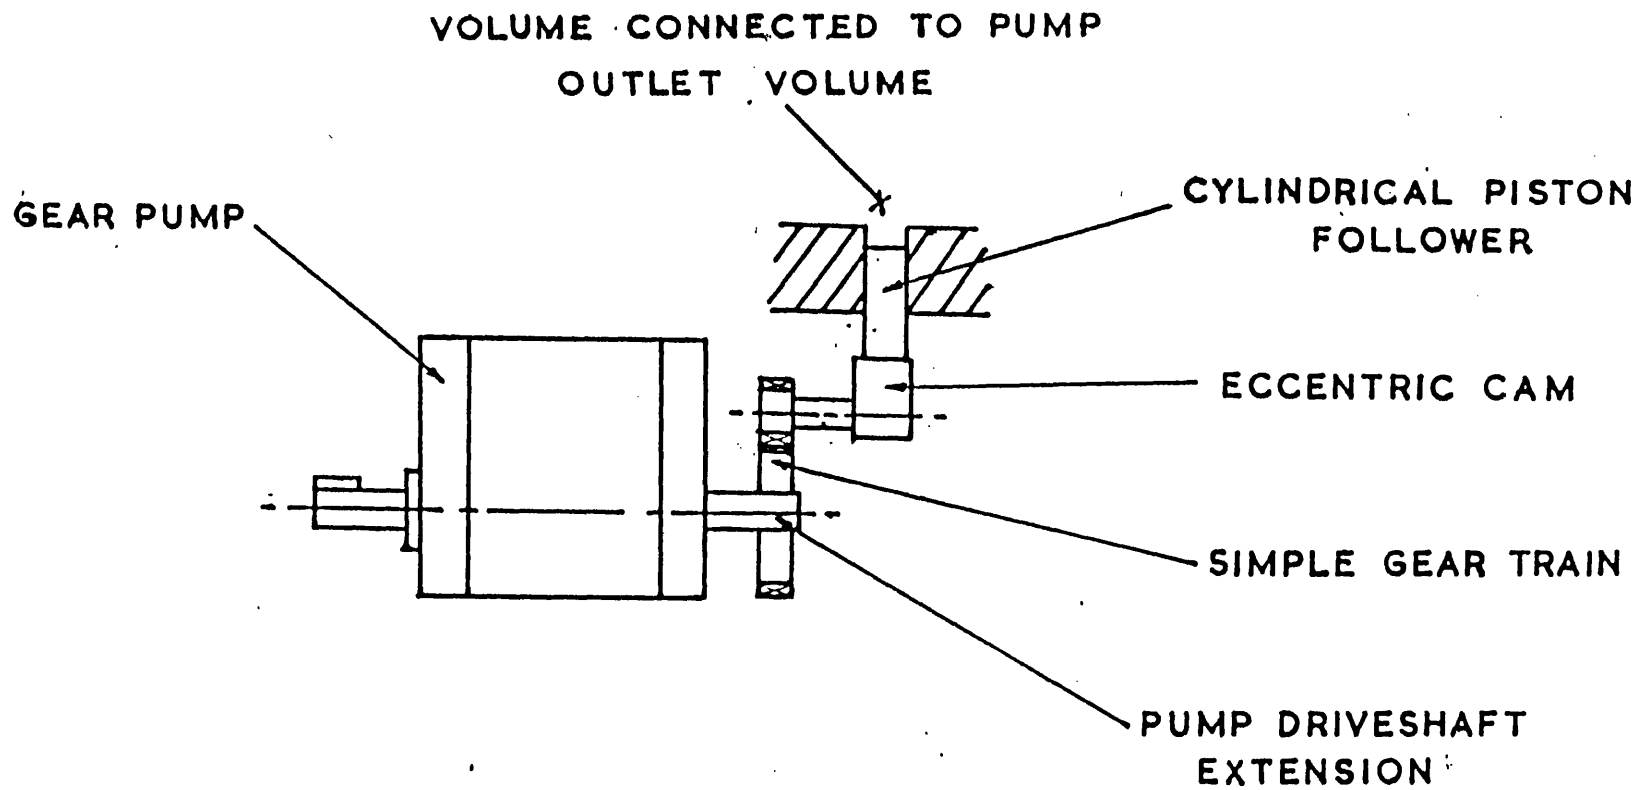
GEAR TRAIN WITH ECCENTRIC CAM AND PISTON-FOLLOWER
